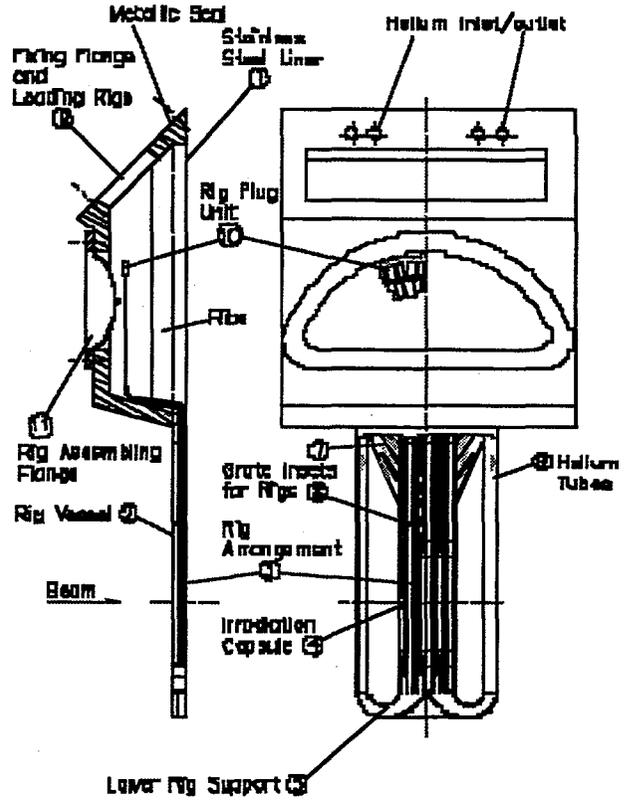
Elevation and front view of the Helium cooled high flux Test Assembly VTA1-He
